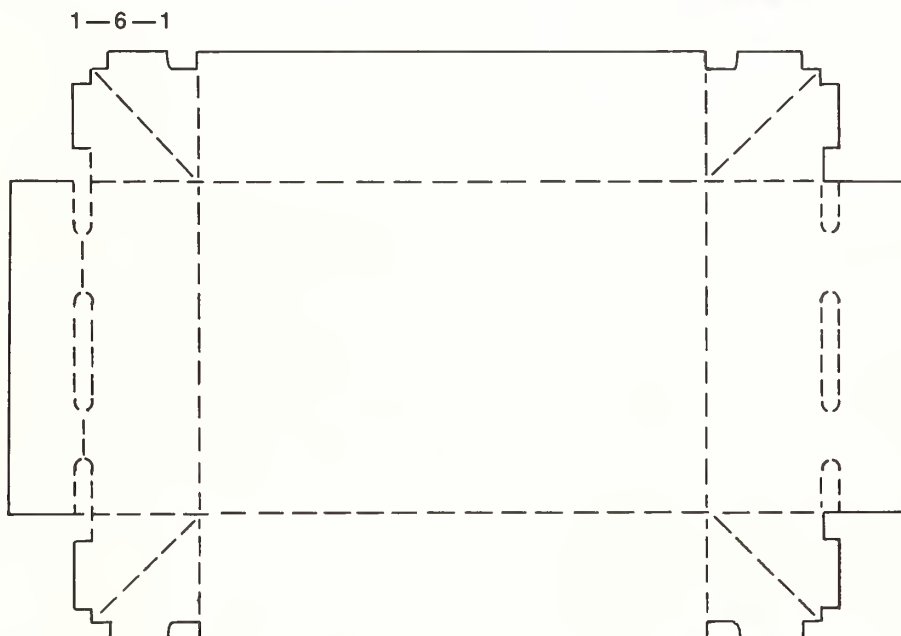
Bottom of die-cut, two-piece, full-telescope shipping container with diagonally scored bellows, folding leakproof corners.
